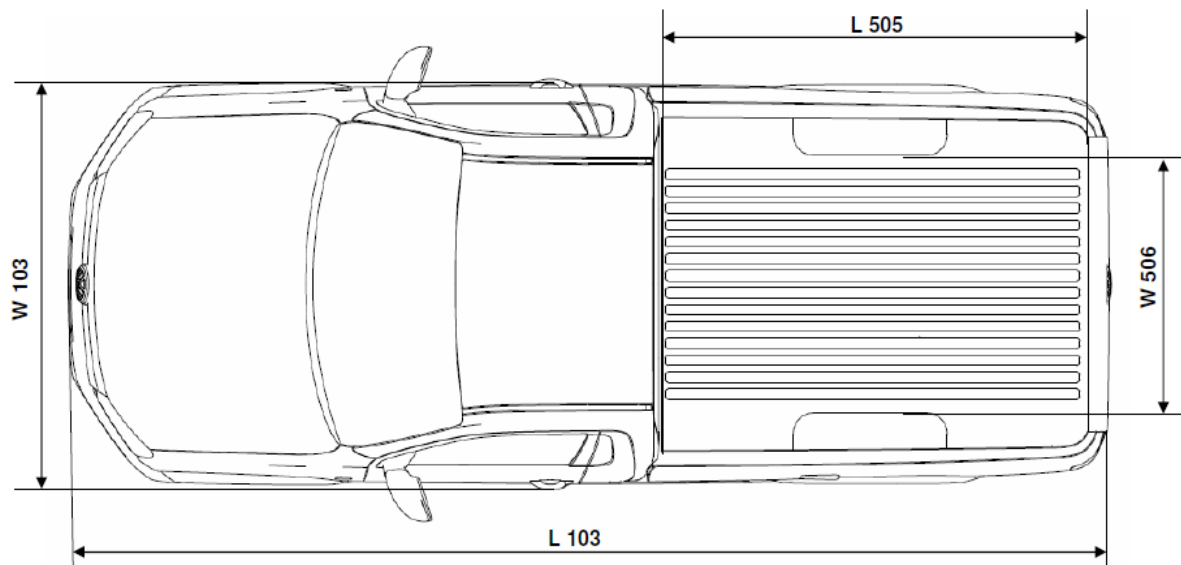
Plan view of AMAROK SC (Single Cab)
